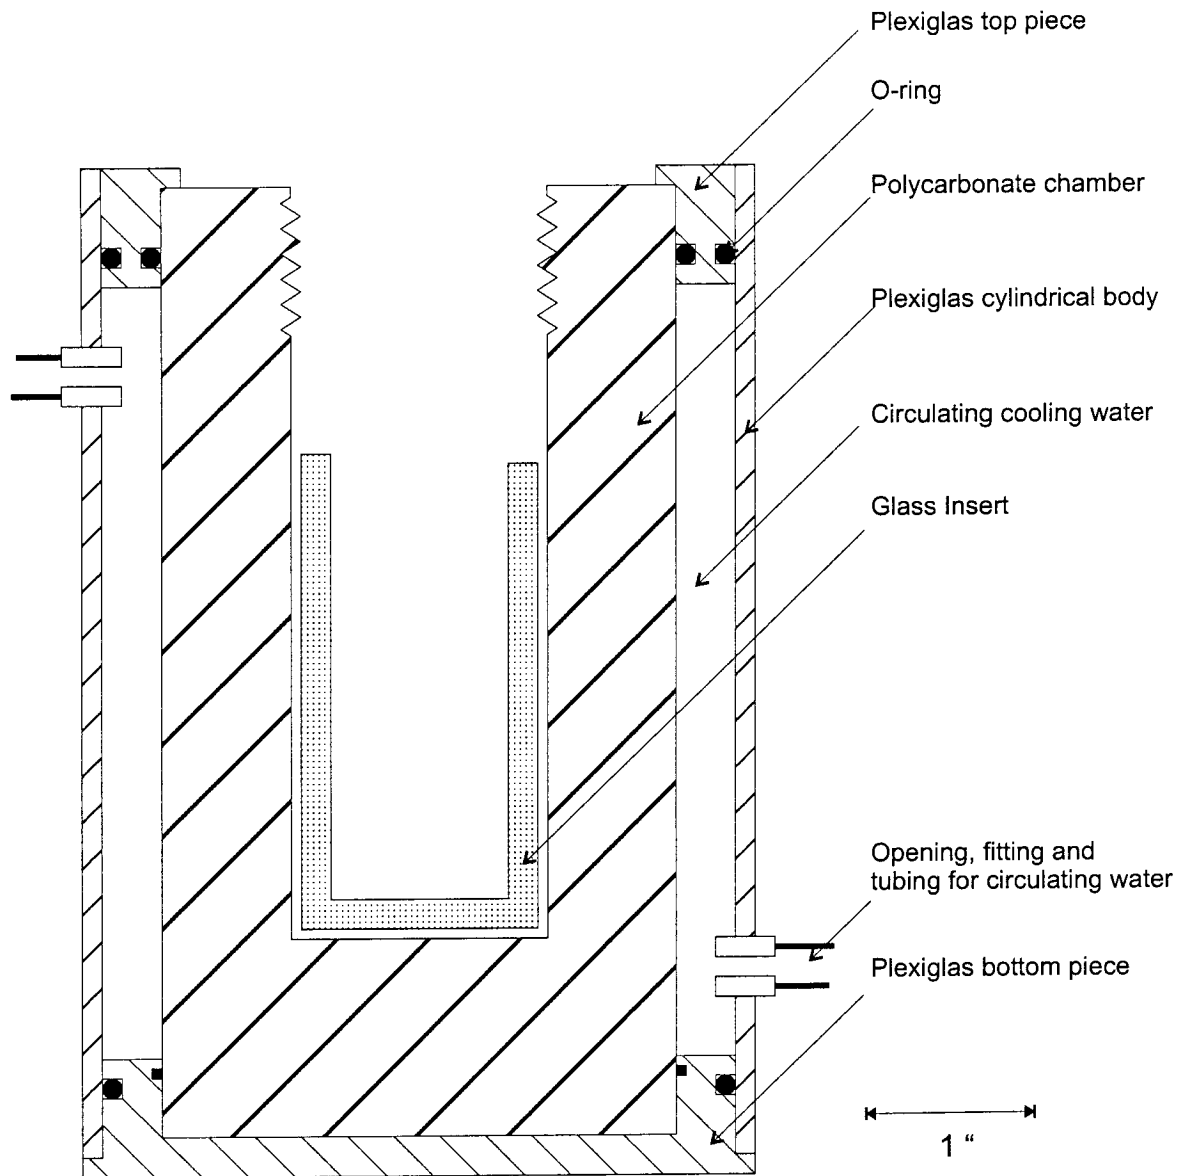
Reactor design showing polycarbonate chamber, glass insert and cold bath casing.
